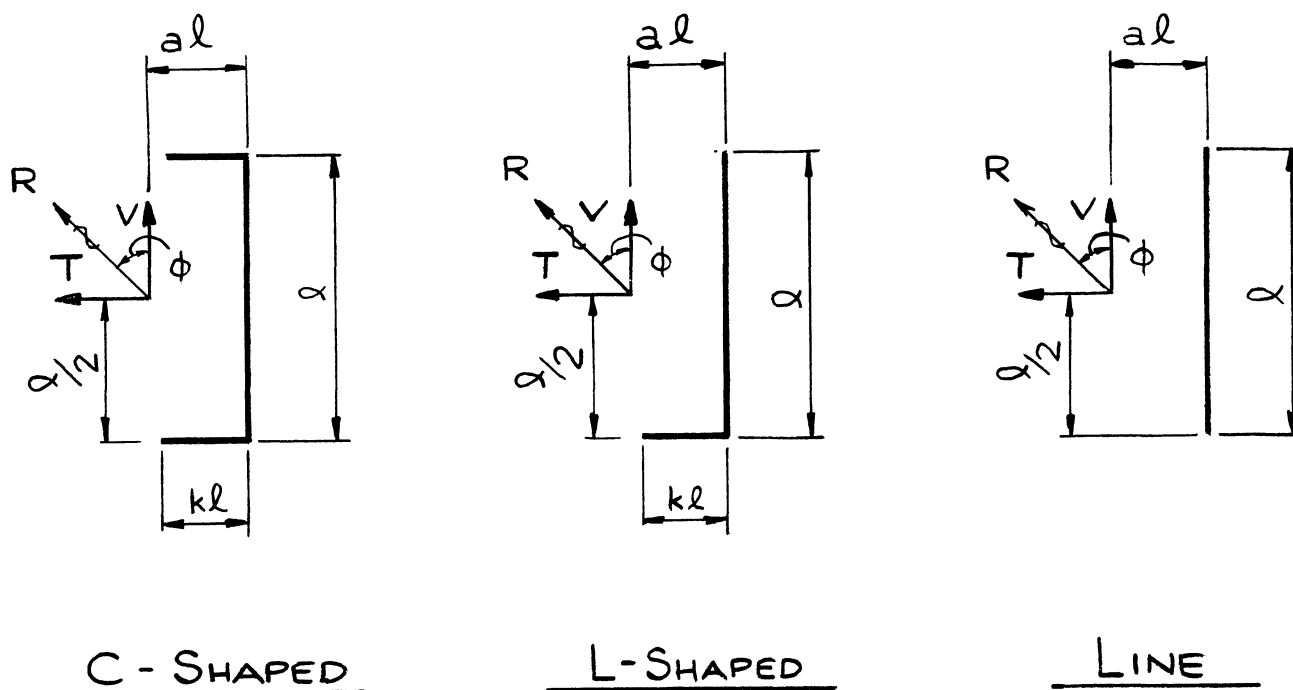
Weld geometries (V and T are applied shear and axial loads, respectively).
